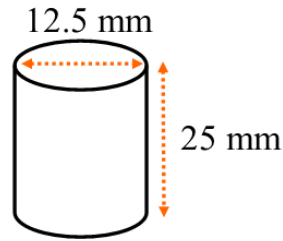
Filled specimen geometry and dimensions (Dolgu lu kompozit numune geometrisi ve boyutları)
